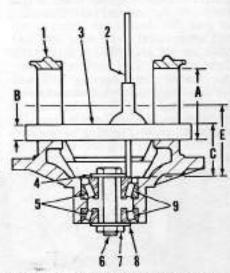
Diagram showing method of securing pinion bearings in support housing to allow depth gage measurement to be taken.
